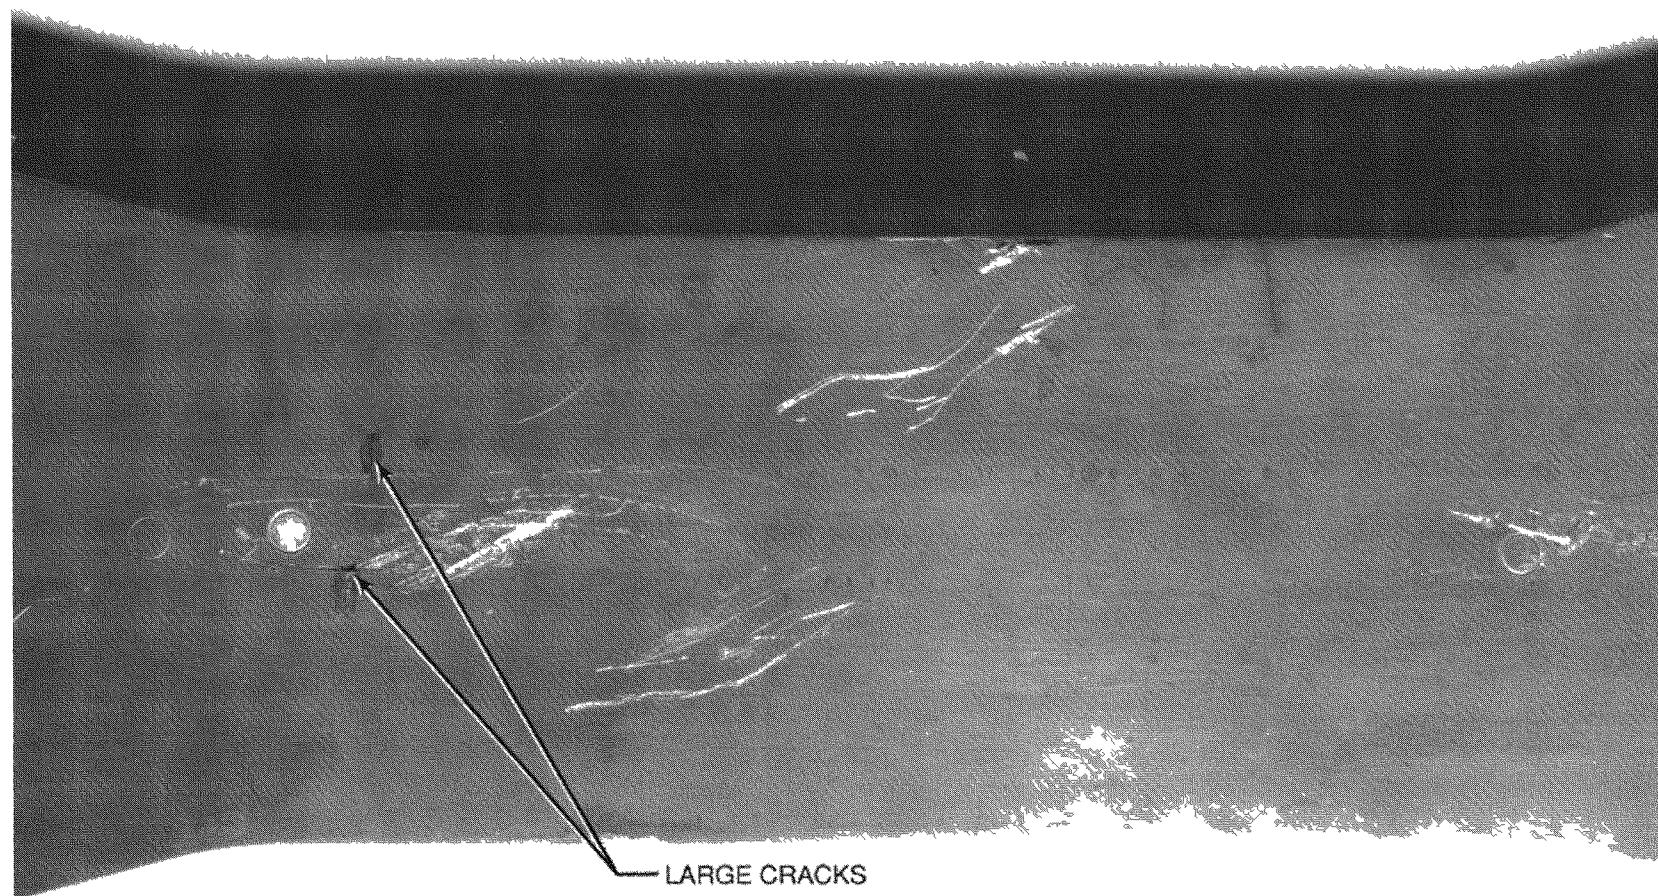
Surface of plate weldment specimen WPCT-7 after 10,400 h of testing.
